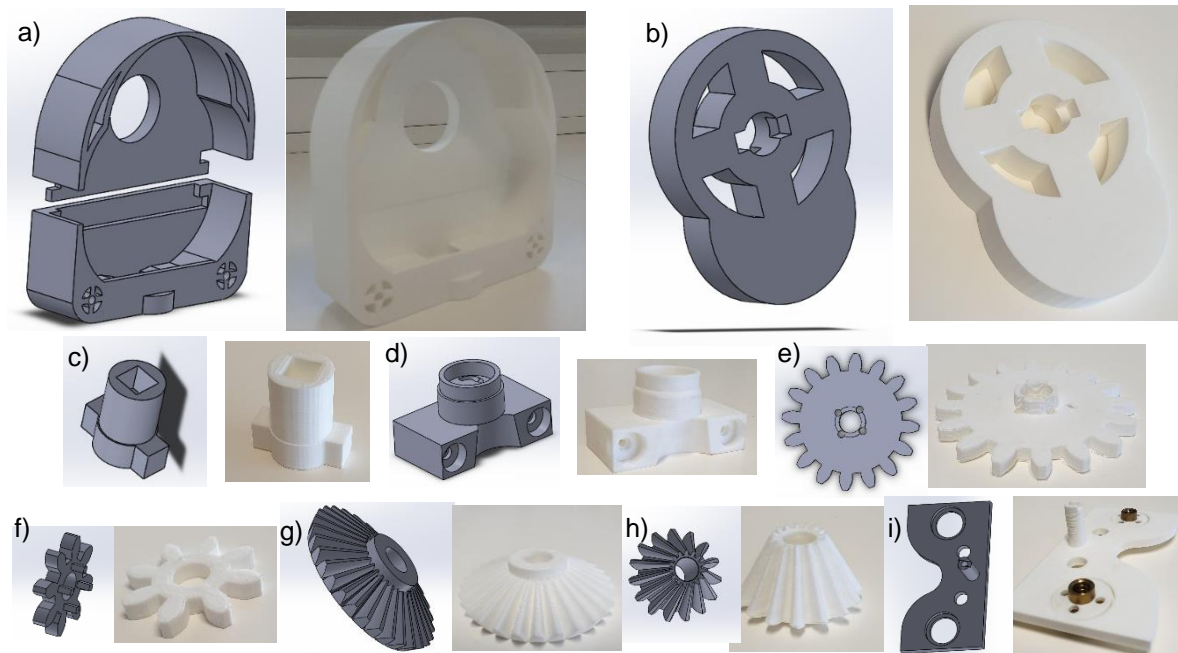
Close comparison of the main components' models and 3D printed parts; a) main Bioreactor chamber; b) Cam actuator; c) Actuator axle parts; d) Secondary chamber; e) bigger flat gear; f) smaller flat gear; g) bigger bevel gear; h) smaller bevel gear; i) positioning system base.
